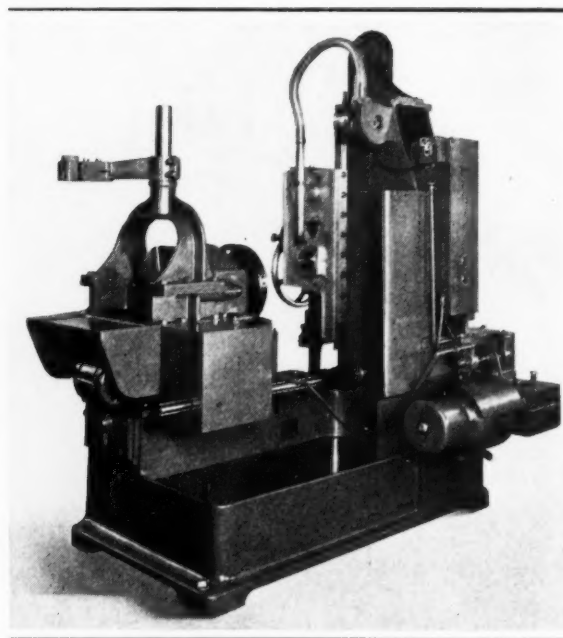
Rear View of the Machine, with the Work-head Horizontal, as in Milling or Grinding Box or Face Cams
